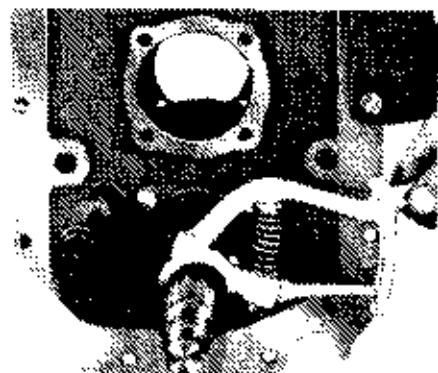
Desired adjustment of countershaft bearings is 15-30 inch pounds to rotate the shaft when mainshaft is out of the transmission.
